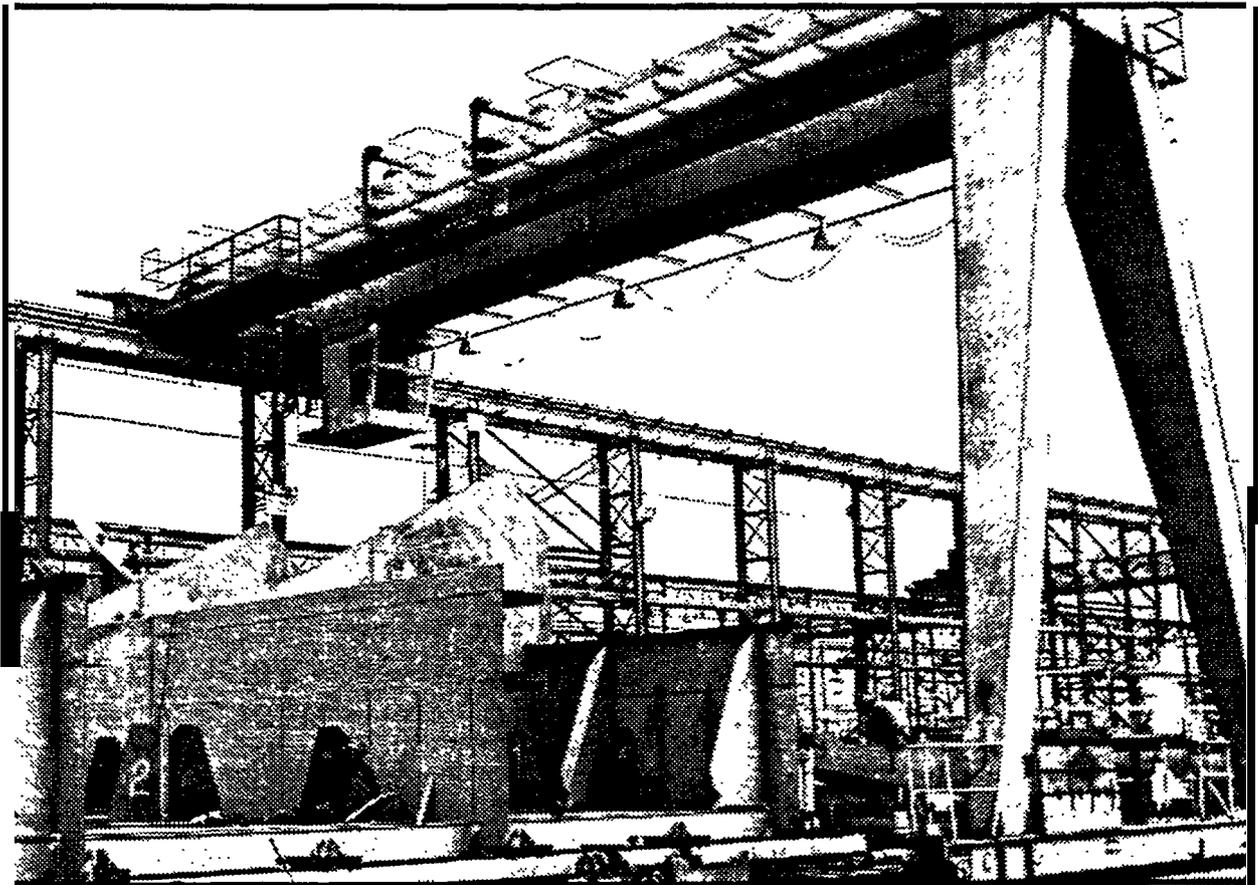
Building Cranes are frequently used at the assembly stage of construction. They are essential in assembling large steel structures.
